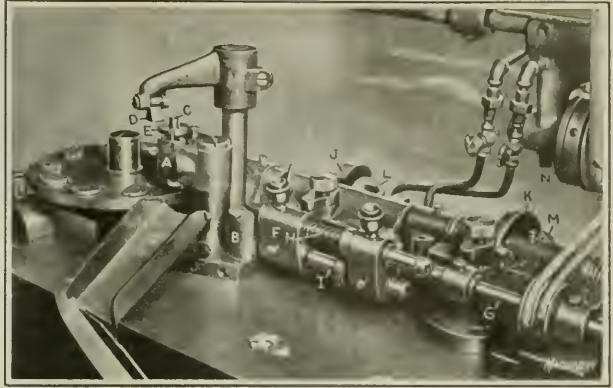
Air-controlled Boring and Milling Machine for machining Clutch Clearance in Barrel Bridges
